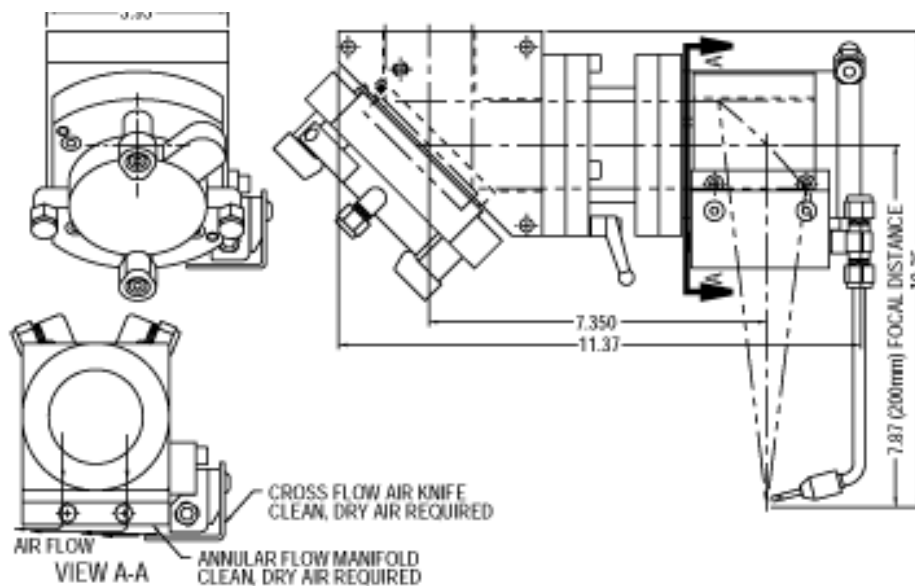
A reflective focusing head assembly from Laser Mechanisms, Inc.
